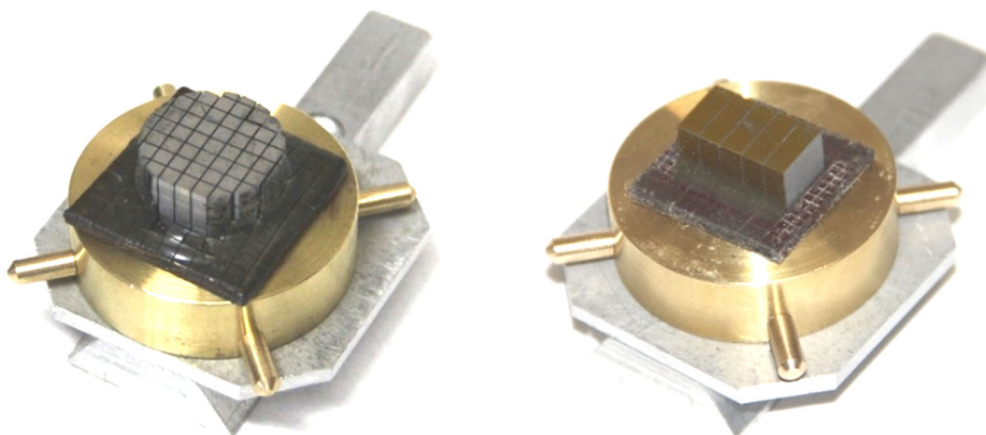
Appearance of the result of cutting the thermoelectric material with the "ALTEC-13009" desktop machine.
